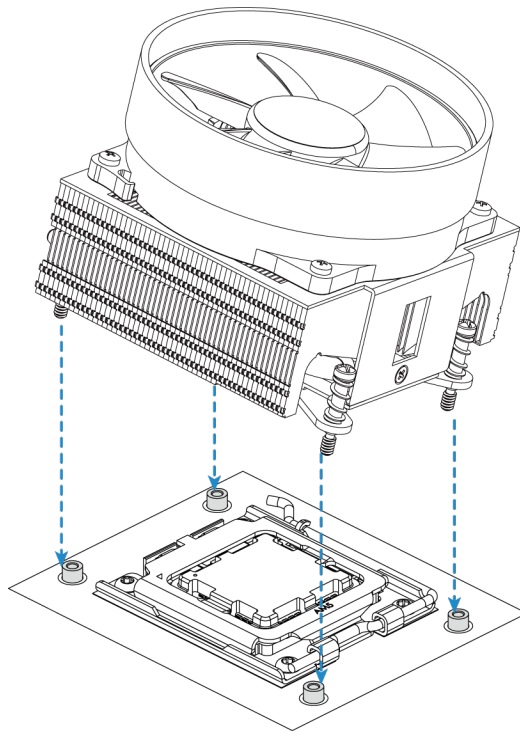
Mounting the Heatsink onto the Socket Frame
